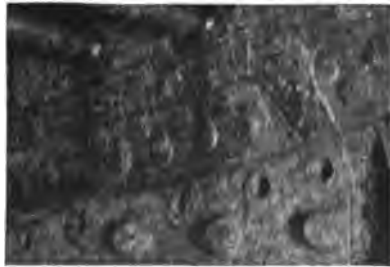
Patch in Boiler with Seam Prepared for Welding
